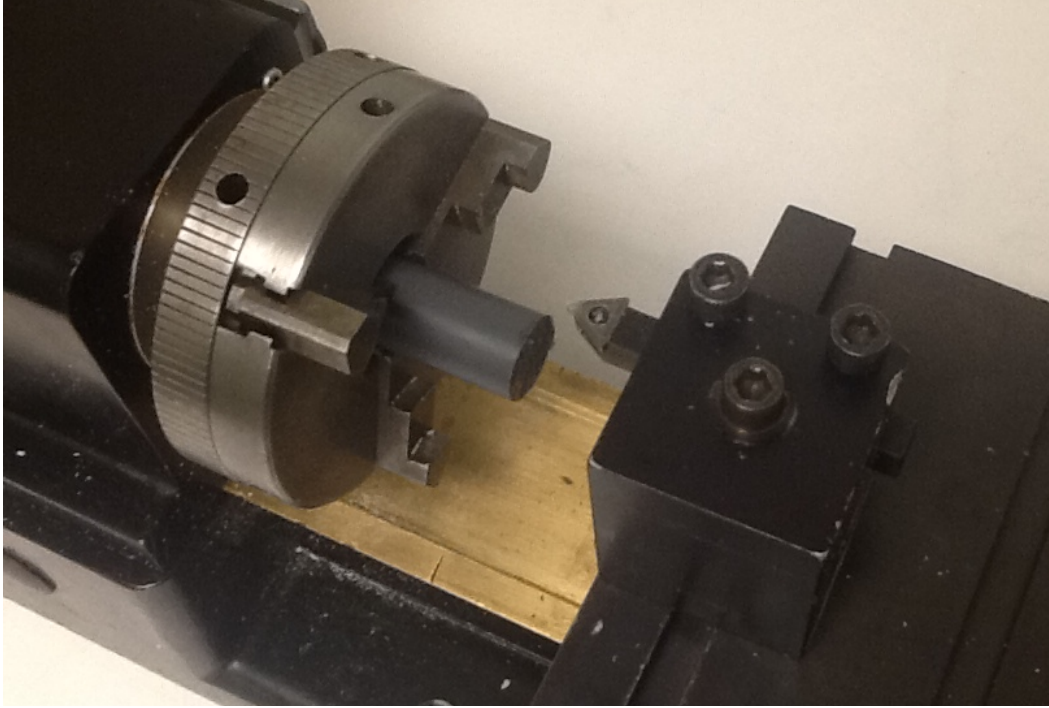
2: Fabrication of socket step 2. Both ends were squared off using a lathe and trimmed to a length of 1.00 inches.
